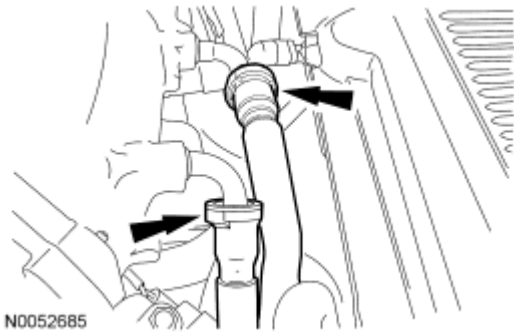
Disconnecting Evaporative Emissions (EVAP) Tube & Brake Booster Vacuum Supply Tube From Throttle Body (TB) Spacer
